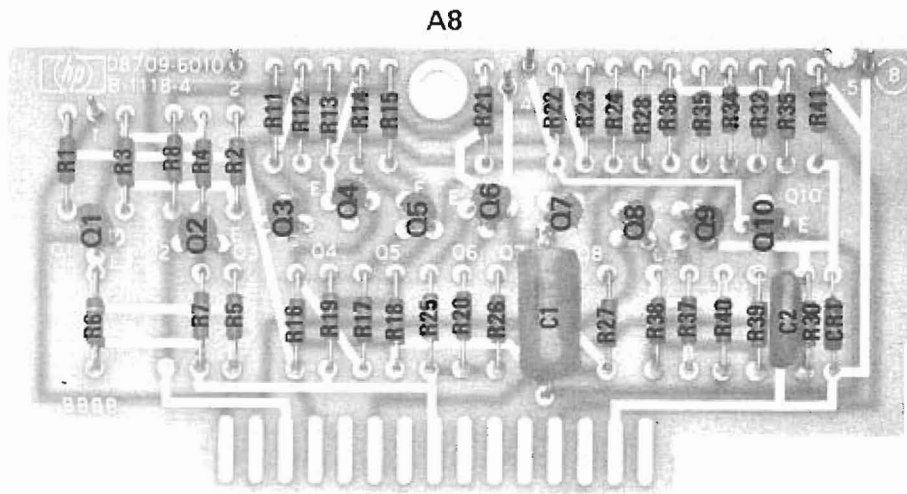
A8 Search Generator Board Assembly Component Identification and Location (Change 4)
